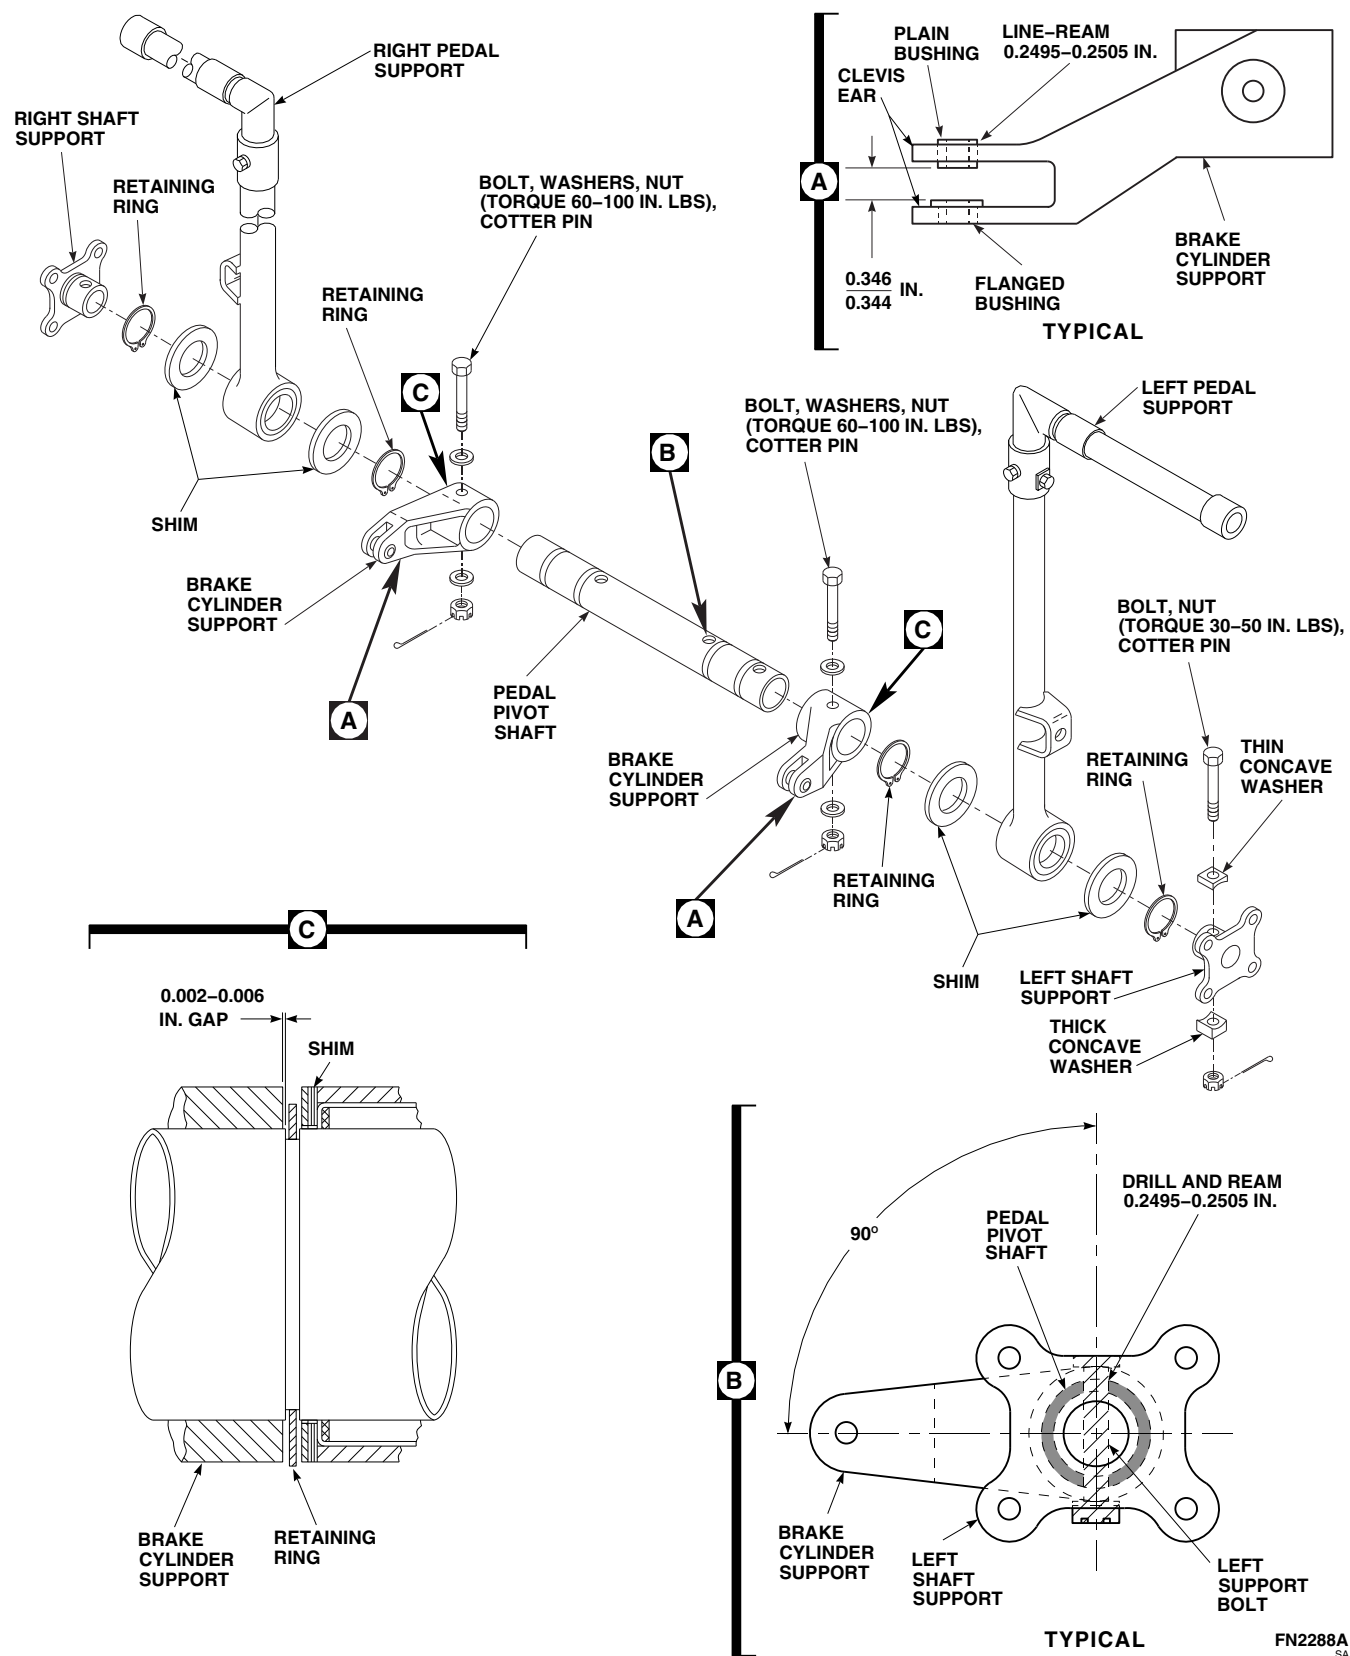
REPAIR YAW CONTROL PEDAL SUPPORT ASSEMBLY, 70400-01601-046 (BENCH)
